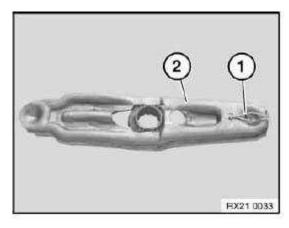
Spring Wire Clip, Ball Pin And Guide Sleeve Courtesy of BMW OF NORTH AMERICA, INC.
